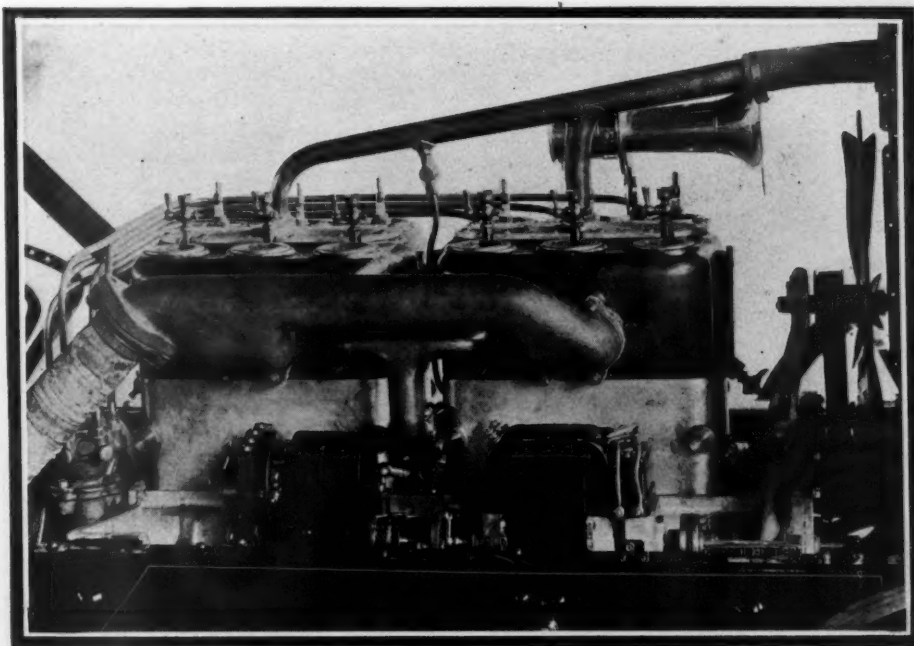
EXHAUST SIDE PREMIER LITTLE SIX MOTOR
